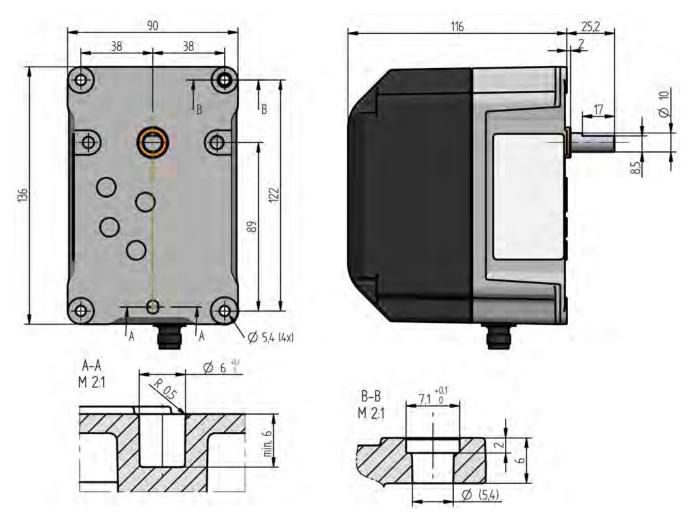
Dimensional drawing of actuator type 662R5001-0 and 662R5003-0 without cable but with plug
